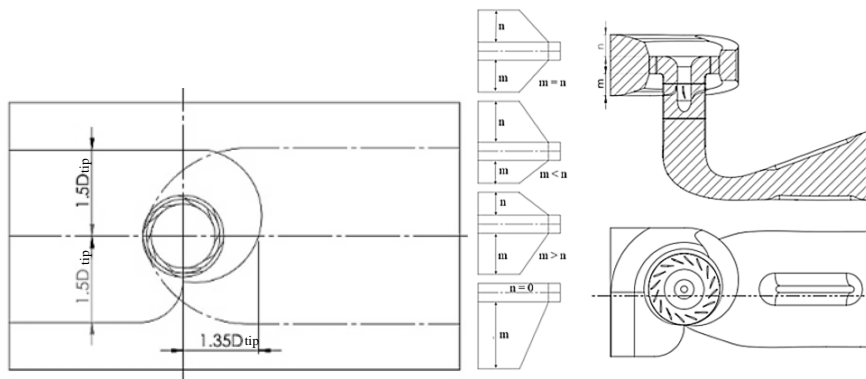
Spiral Casing Dimension (left) and Cross-sectional area of flow in Spiral casing (right) [15]
